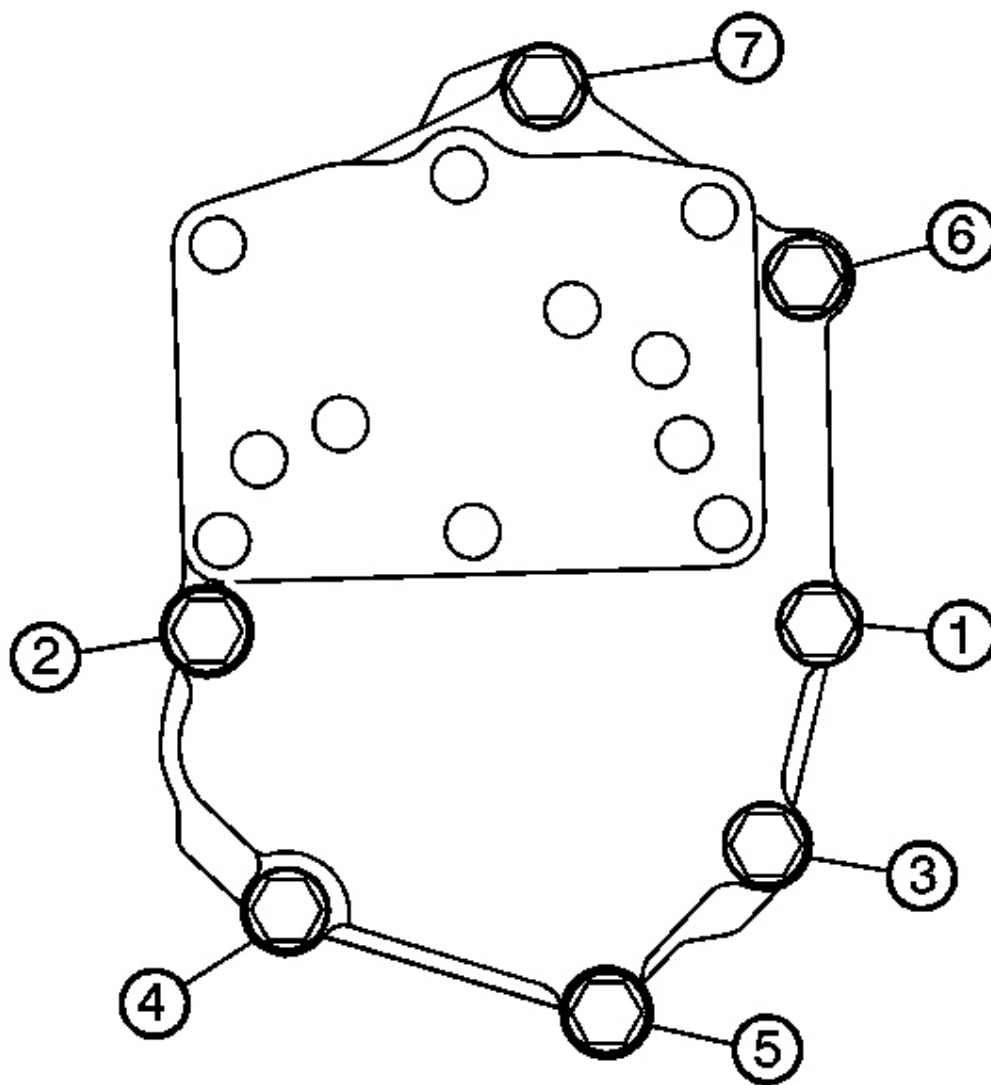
Tightening The CPC Solenoid Manifold Bolts In Sequence
